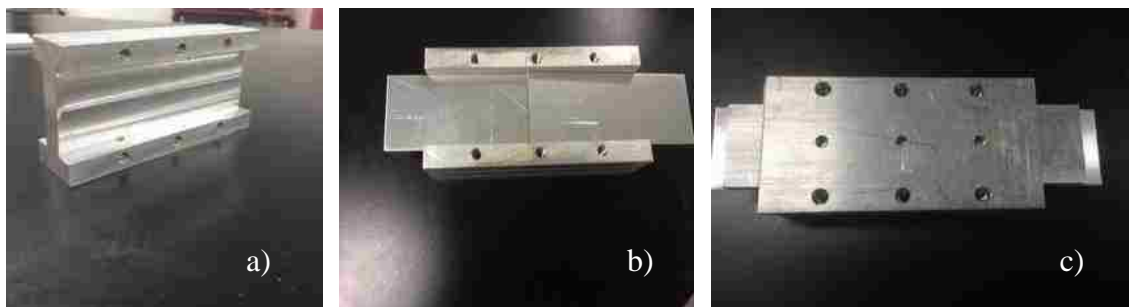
On the left a) view of the H-cross sectional shape of the fixture; in the center b) adherends are kept aligned inside the fixture; On the right c) top plate provided with threads to which attached bolts provide the required pressure to fixture the samples
